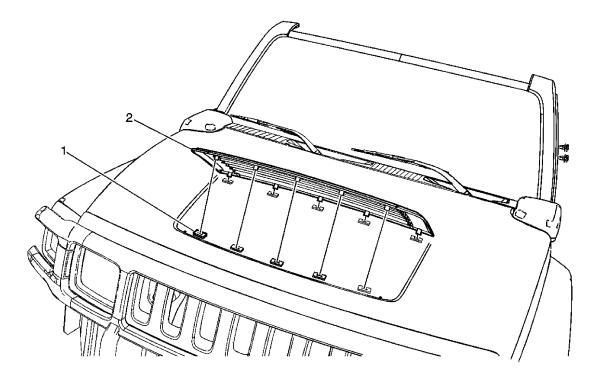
Grille Replacement - Hood Air Courtesy of GENERAL MOTORS CORP.
